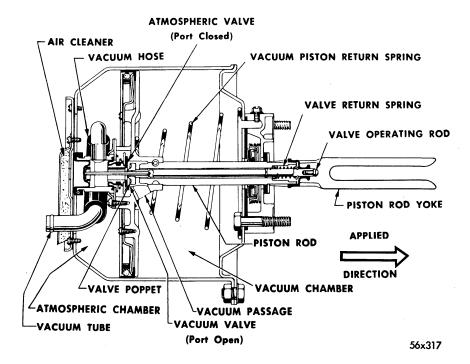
Power Cylinder—Piston Type (Cutaway View)
